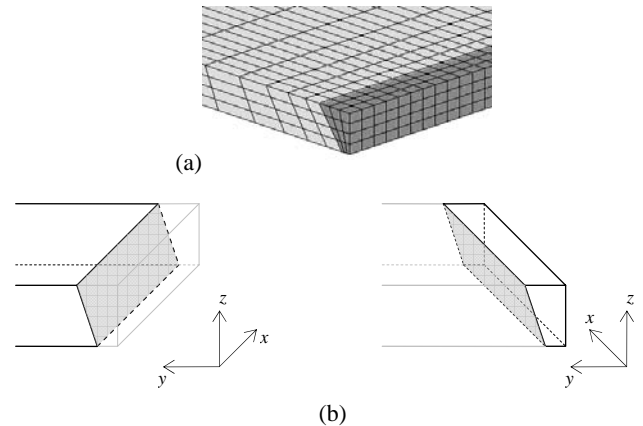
(a) Meshing of the plate and the weld pool. (b) A schematic diagram of the contact surfaces
